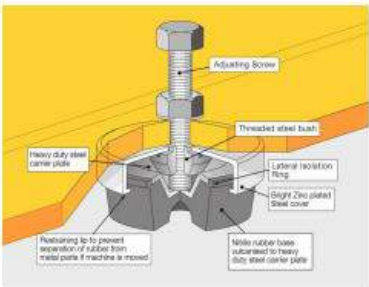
Injection moulding machines installed on Farrat Isomounts
